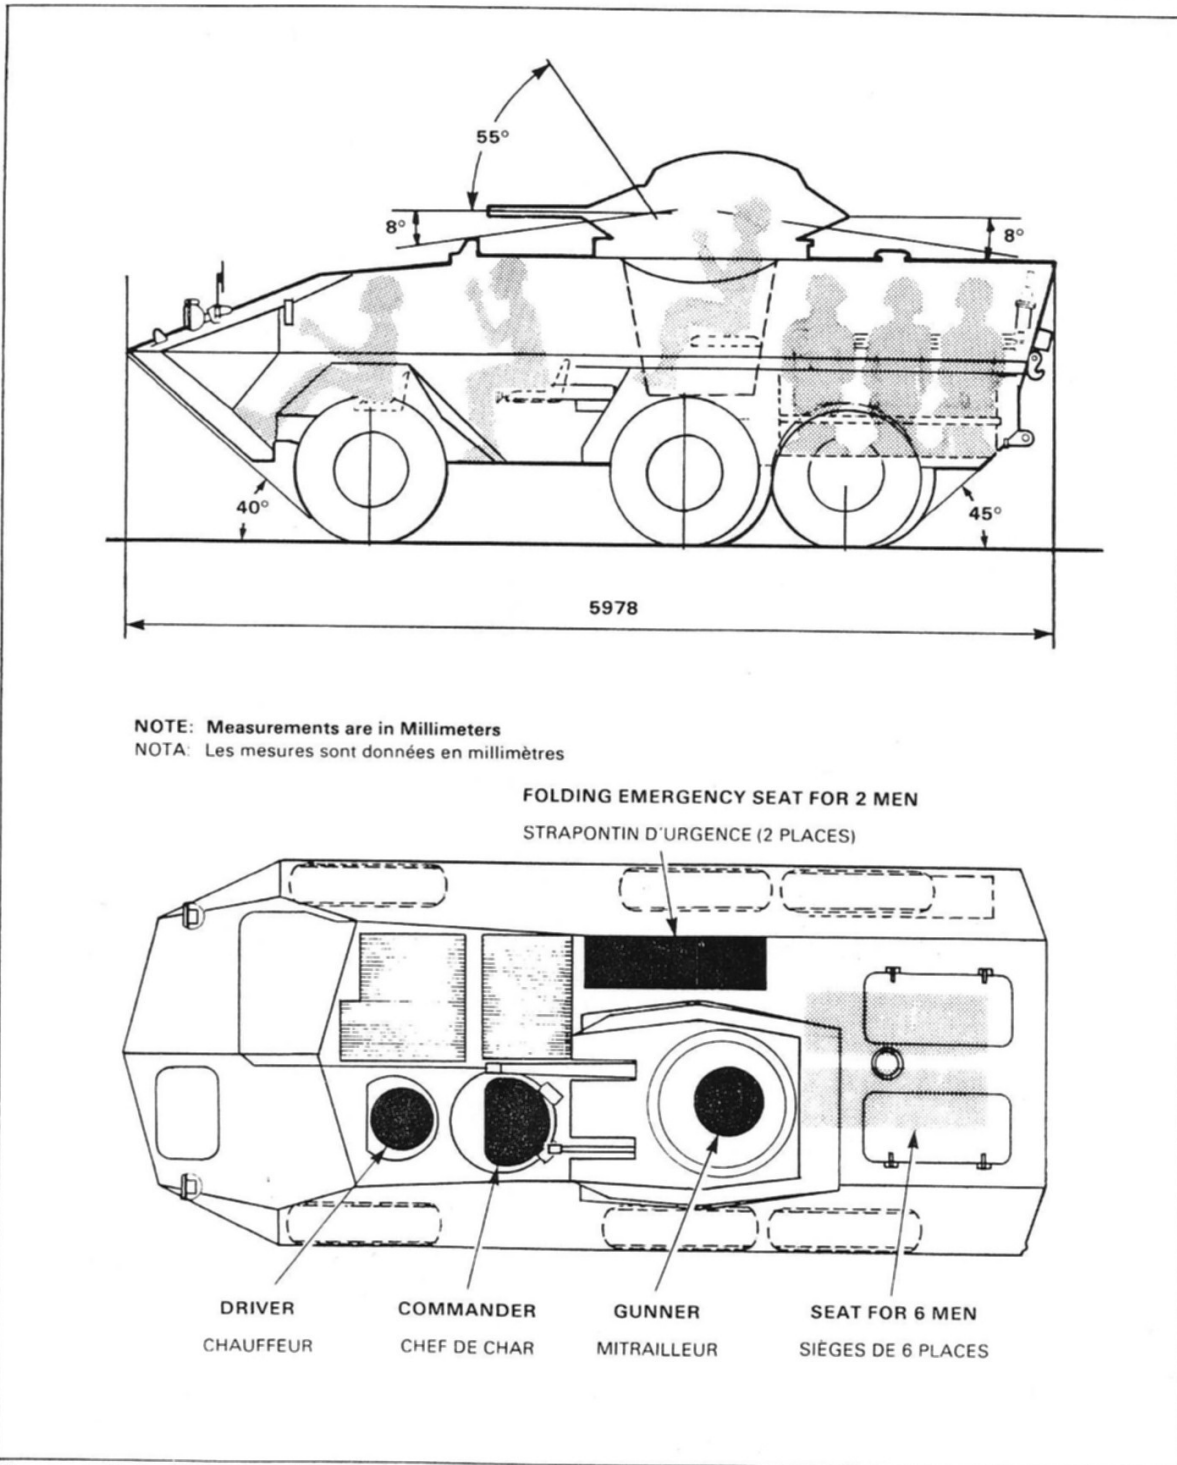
Grizzly — Dimensions with Top and Side View Seating Arrangements
